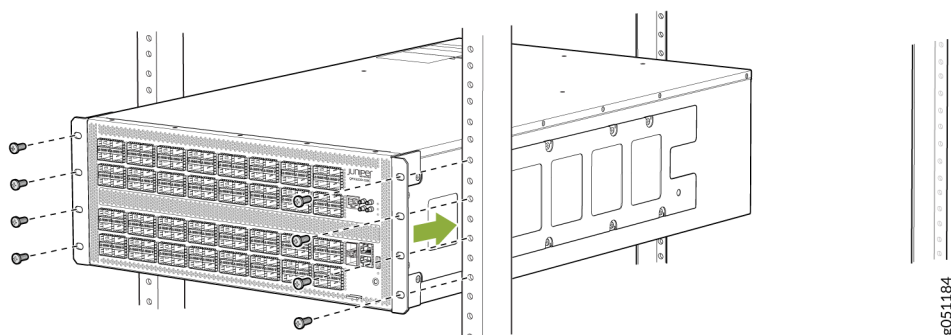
Attaching Mounting Rails to the QFX5220-128C Chassis
